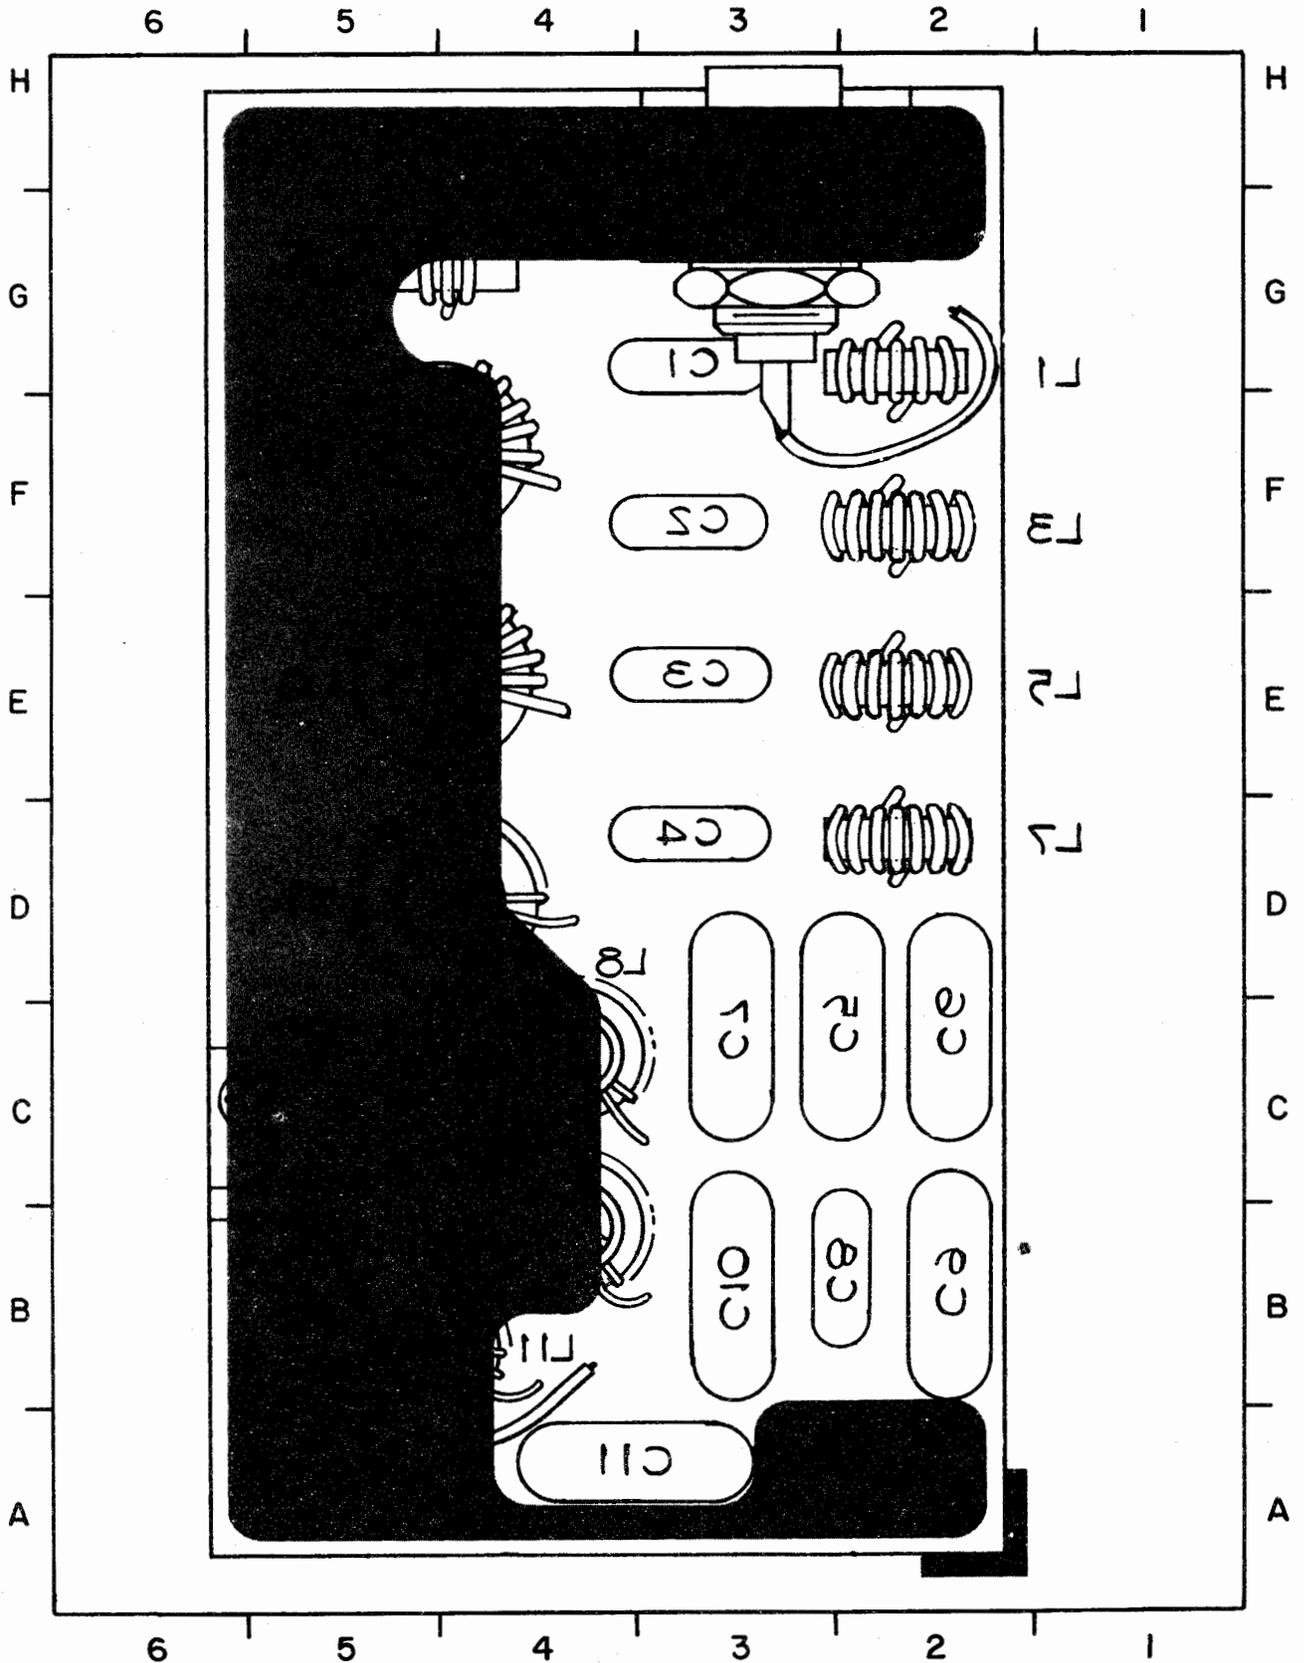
RF Filter 1A1, 34-0121, Parts Location (Bottom View) (Sheet 2 of 2)
